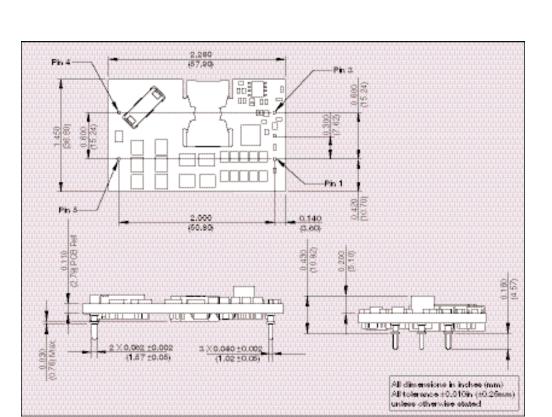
Horizontal Mechanical Drawing and Pinout Table
